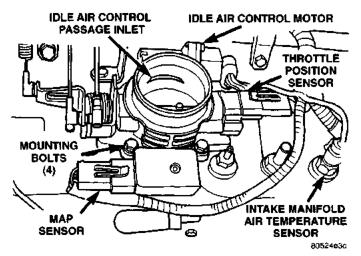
Throttle Body and Sensor Locations-4.0L Shown
